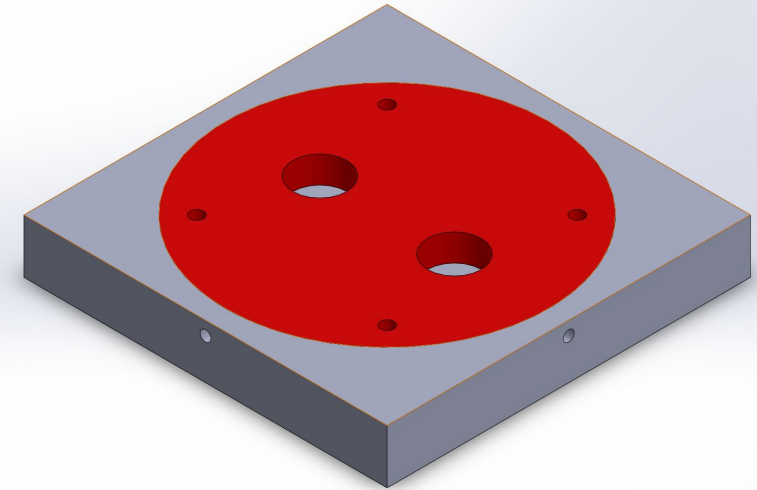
Isometric View of a Bulkhead with a manufacturing jig
